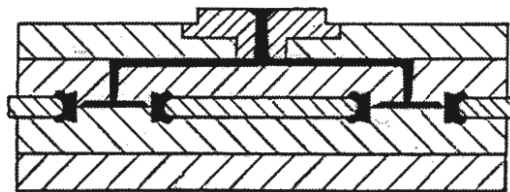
Three-plate mold for curing ring-shaped articles [363]
